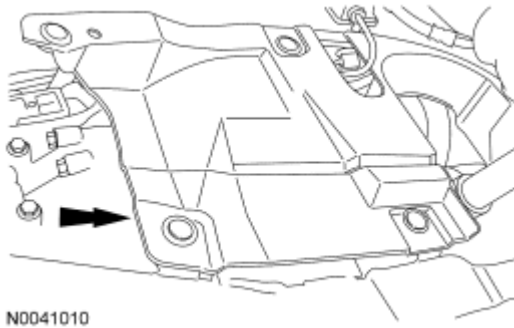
Locating RH Front Structure-To-Subframe Splash Shield
